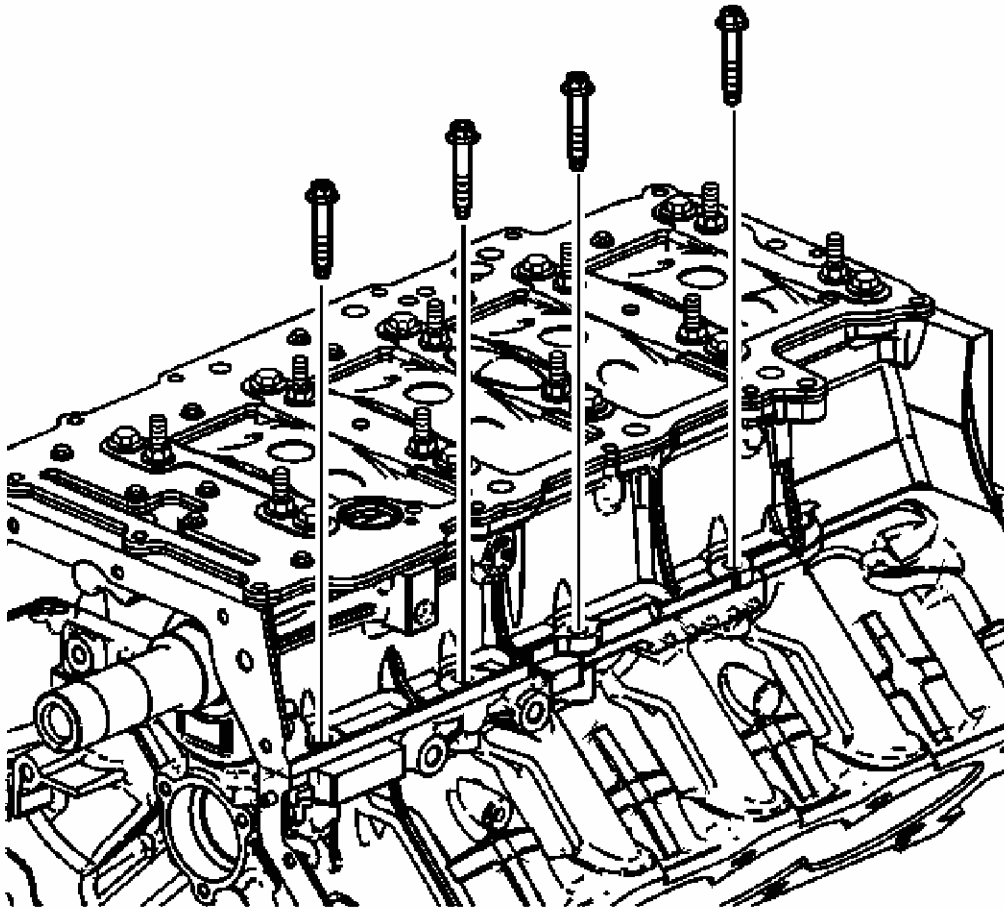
Identifying Lower Crankcase Perimeter Bolts - Right Side
